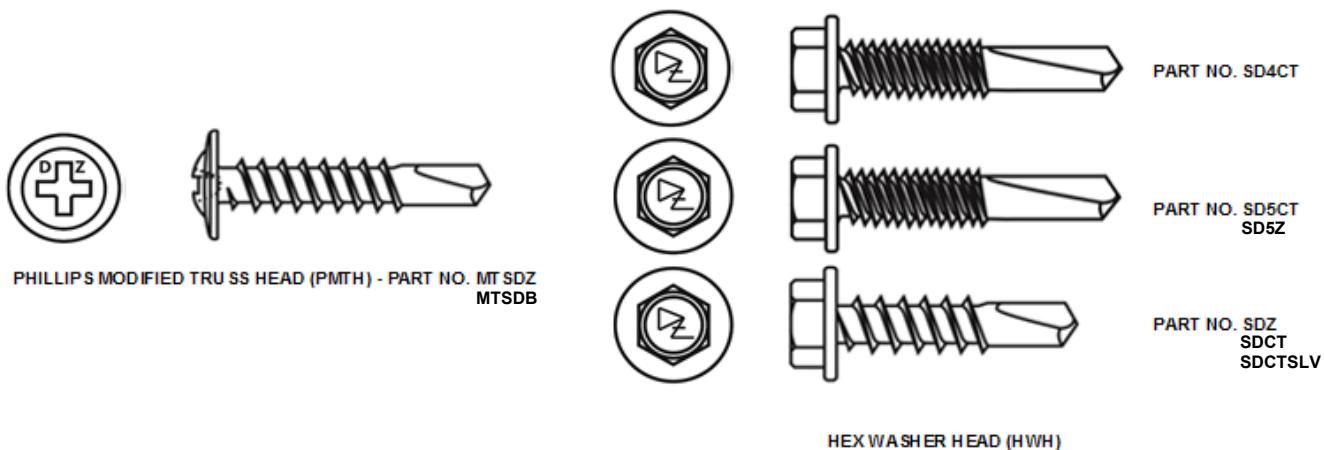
DAGGERZ™ SELF DRILLING FASTENERS
